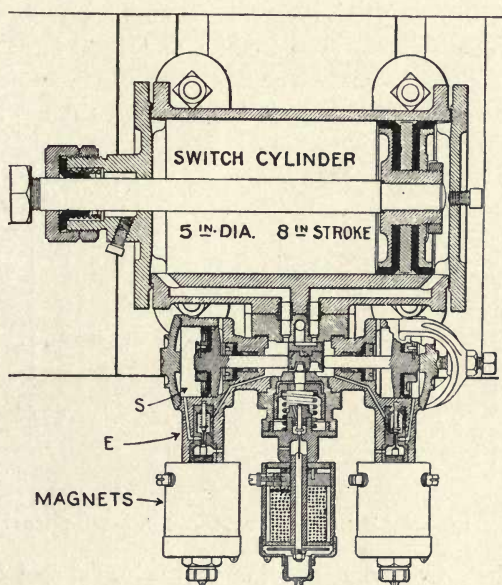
FIG. II—SECTIONAL VIEW OF CYLINDER AND VALVE
